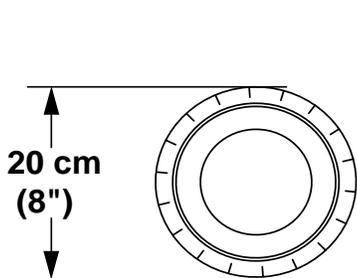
A. RALLY WHEEL DIMENSIONS (FRONT)
